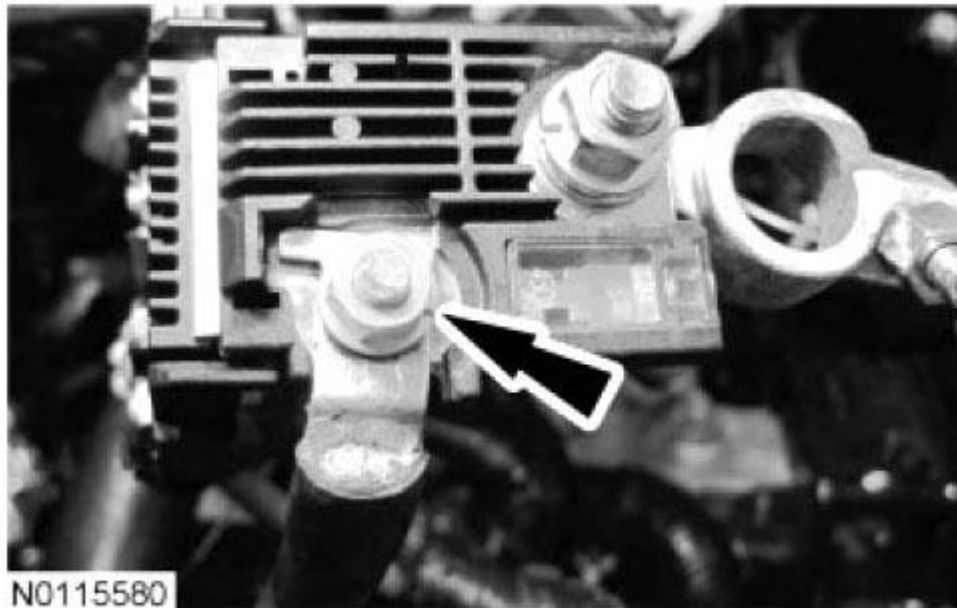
Locating Positive Battery Cable Terminal And Nut
